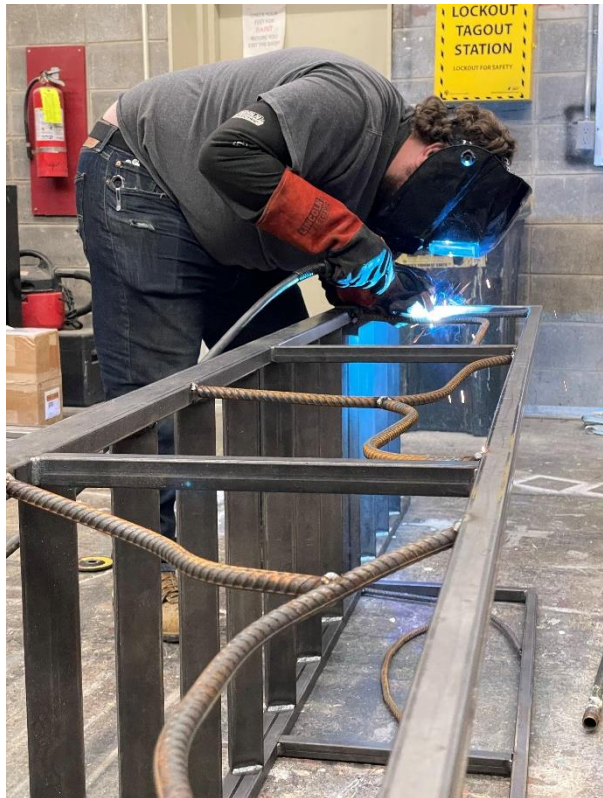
Technical Director, Mr. Christopher Sheriff welding the rebar to the steel
